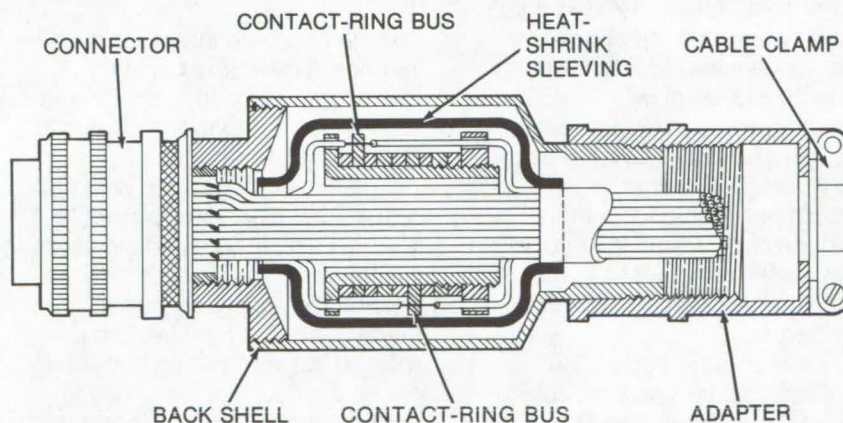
In the Complete Cable Assembly wires to be terminated are soldered to their respective contact rings, and the entire adapter is insulated from the rest of the assembly with a tubular heat-shrink covering.
